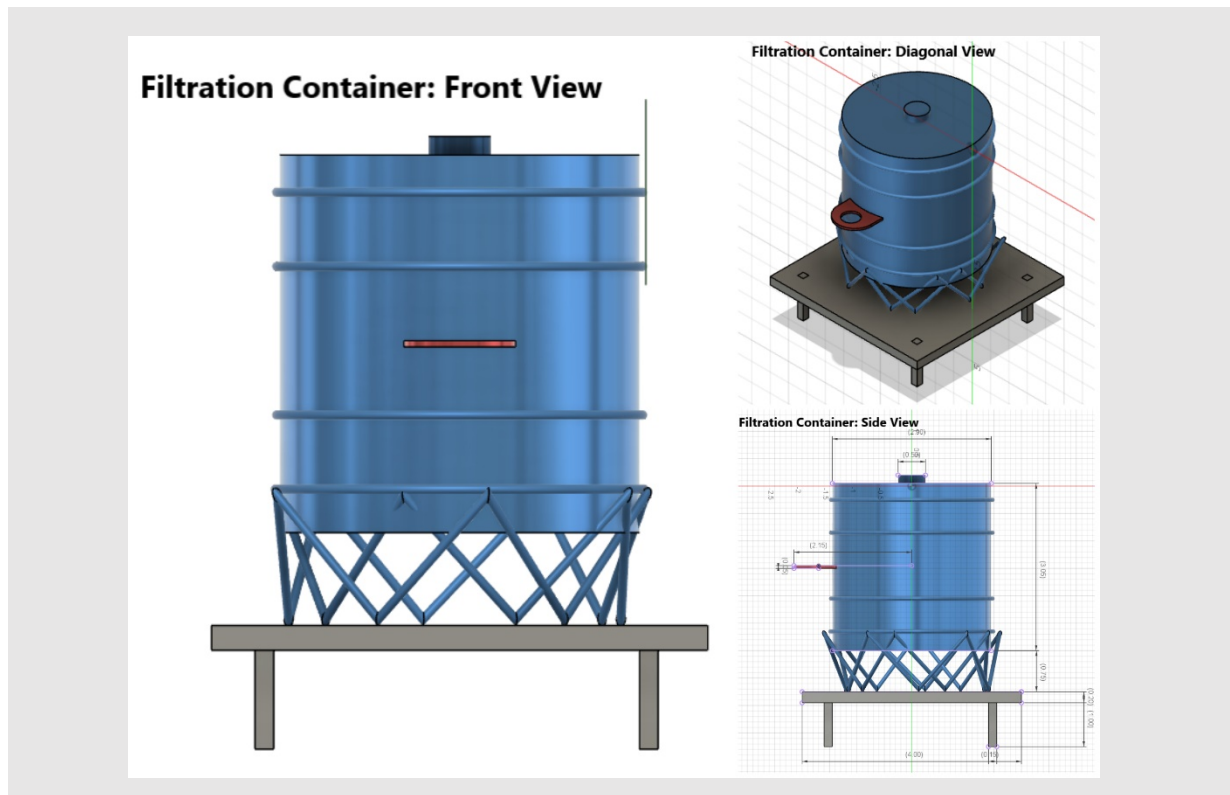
CAD drawing of the CDC's water storage and filtration system – a filtering water tank.
